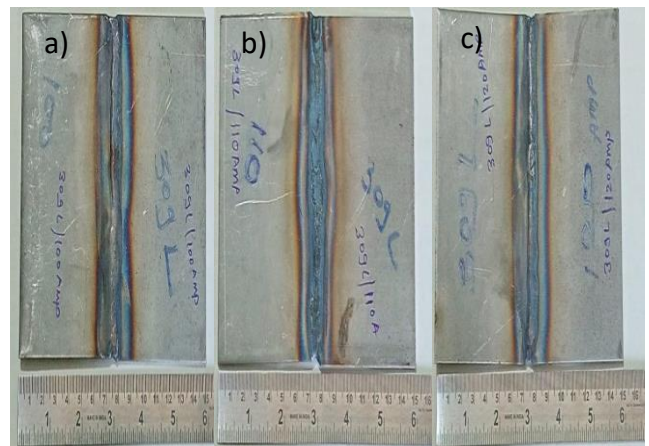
Welded plates with a) LWC b) MWC and c) HWC
